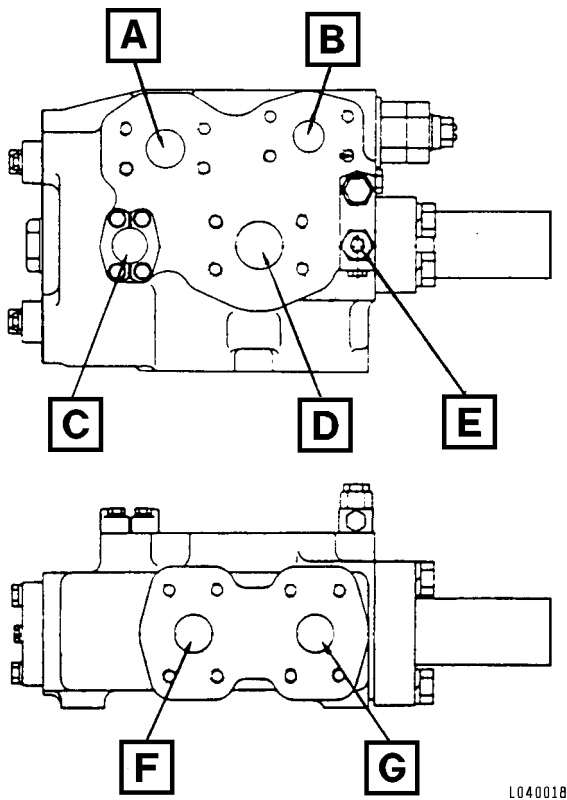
DEMAND VALVE ASSEMBLY
